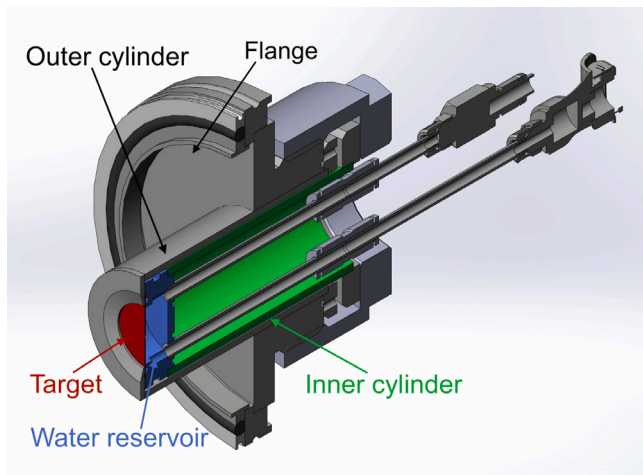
A cut-away 3D render showing the target holder designed for this experiment. To change the target, the inner and outer cylinder assembly is detached from the flange. The inner cylinder is removed from the outer cylinder, allowing the irradiated target to be replaced with a fresh one. The cylinders are then reassembled and remounted onto the flange. See text for more details.
